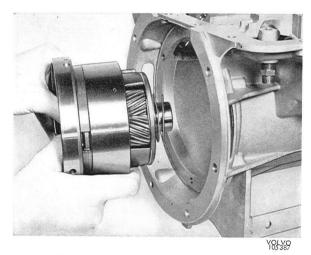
Installation of center support and planet gears with needle thrust bearing and plate washer
